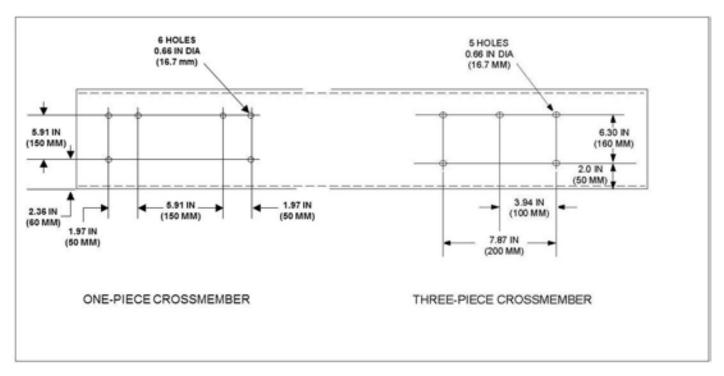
Crossmember Gusset Hole Patterns (Additional Holes Available in 50 mm Horizontal Increments)
